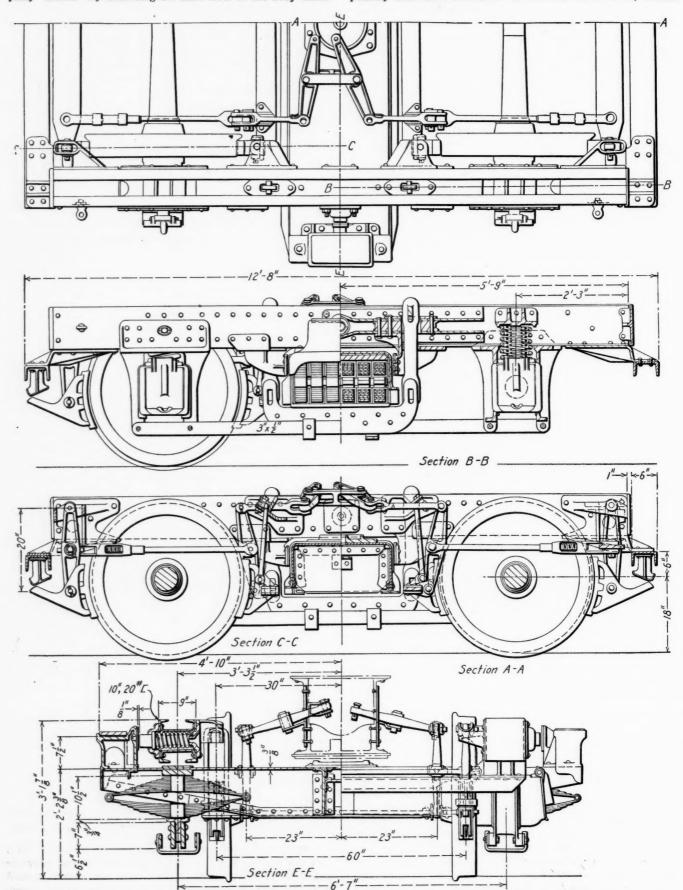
Original Four-Wheel Steel Passenger Car Truck with Clasp Brakes Applied; Pennsylvania Railroad
